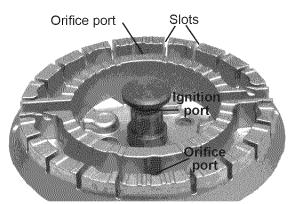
Dual ring burner head (Models equipped with double ring burner only)
